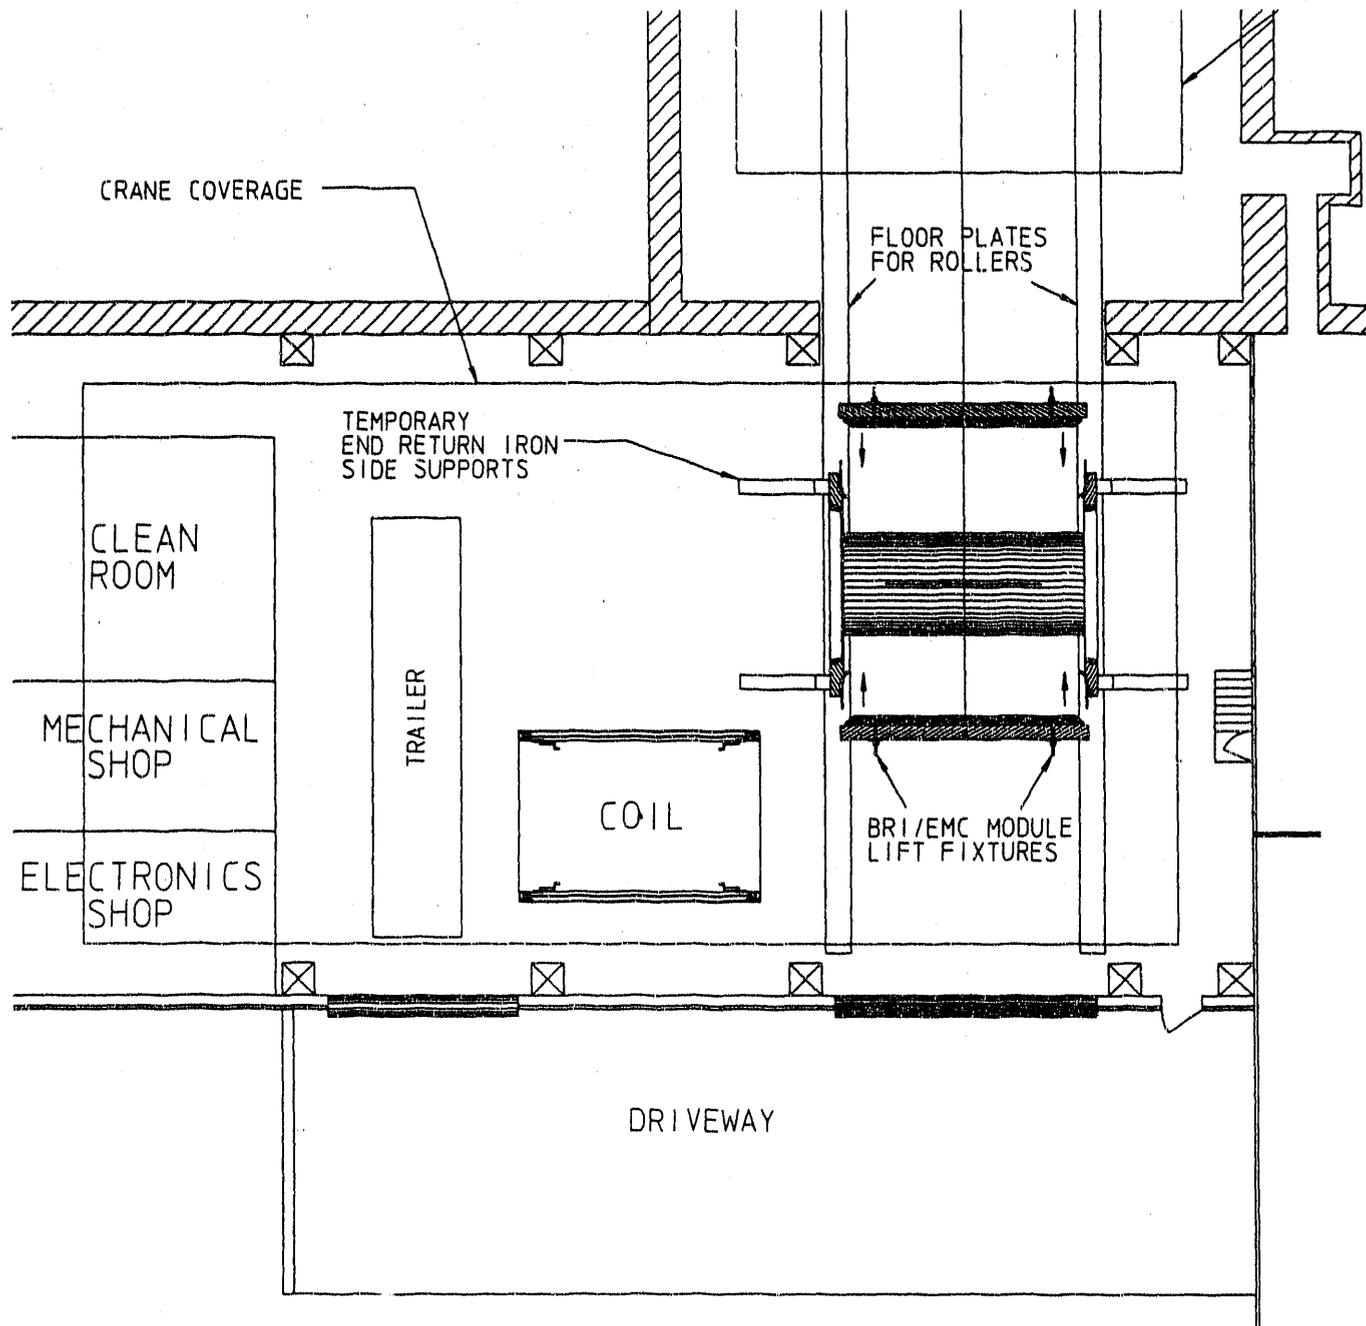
Barrel return iron (BRI)/EMC module assembly.
